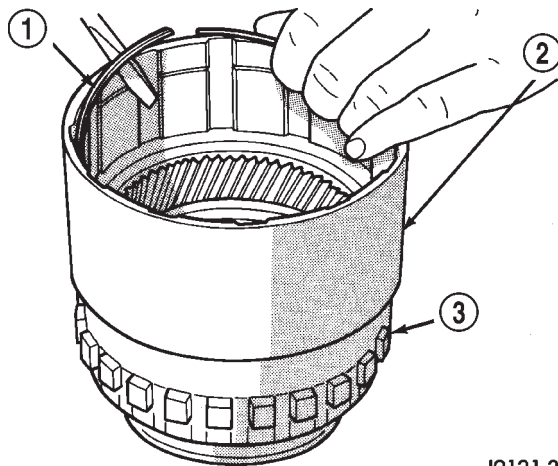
Marking Direct Clutch Drum And Annulus Gear For Assembly Alignment
